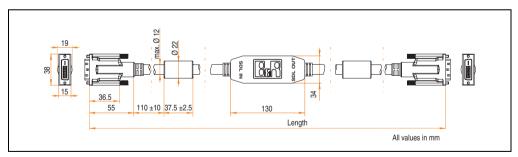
Dimensions - SDL flex cable with extender 5CASDL.0xx0-13
